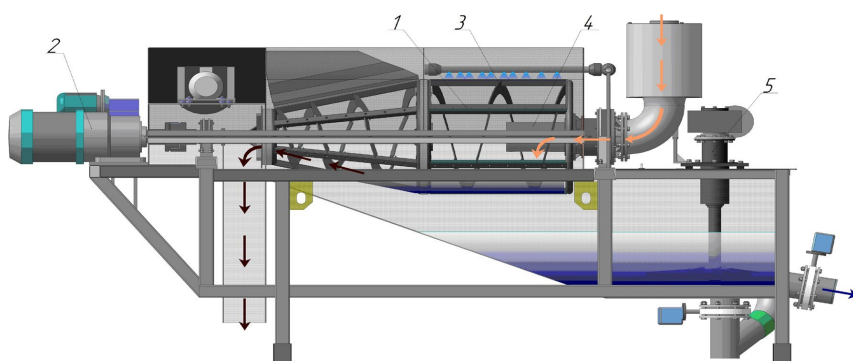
Operation diagram of the Ecomash DS drum sieve: 1 – rotor; 2 – gear motor; 3 – spirals; 4 – feed pipe; 5 – mixer
